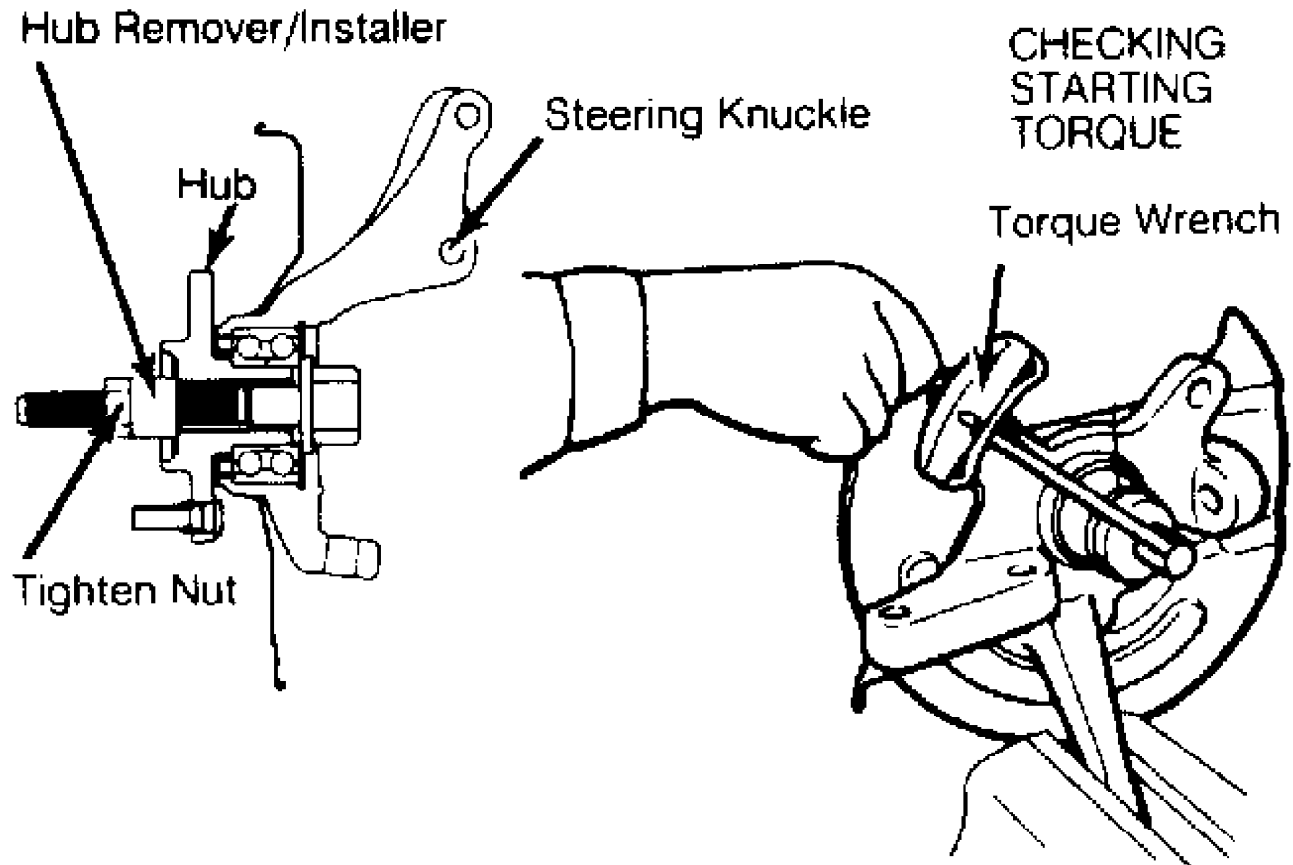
Installing Hub & Checking Bearing Starting Torque (All Models)
